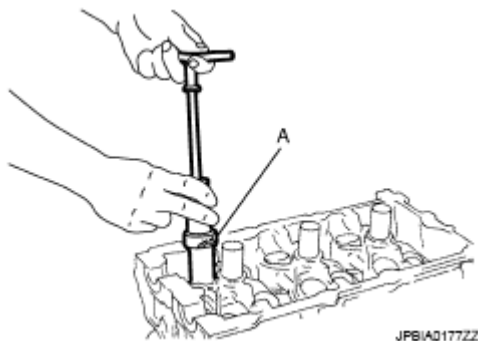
Using Valve Oil Seal Puller To Remove Valve Oil Seal
